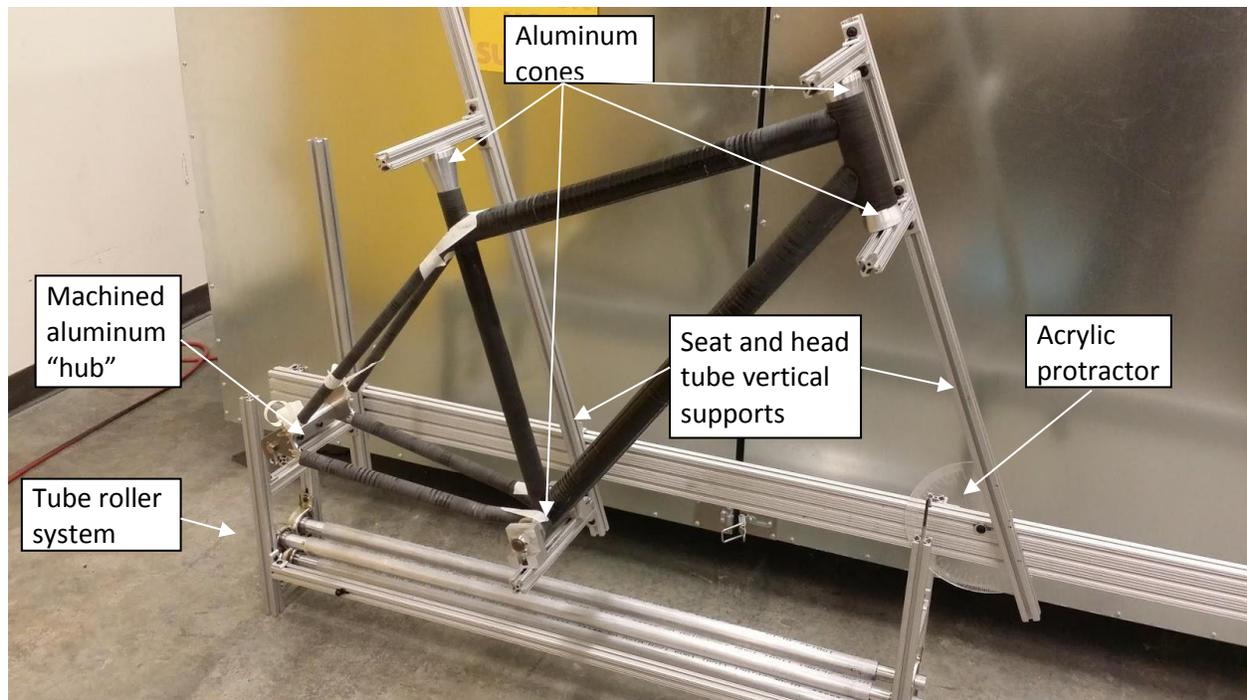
Bike frame jig constructed from extruded aluminum, aluminum L brackets, turned aluminum cones, and aluminum hub. The acrylic protractor is used to set the angles of the seat and head tube vertical supports. The tube roller system acts as the jig stand and helps stabilize the system.
